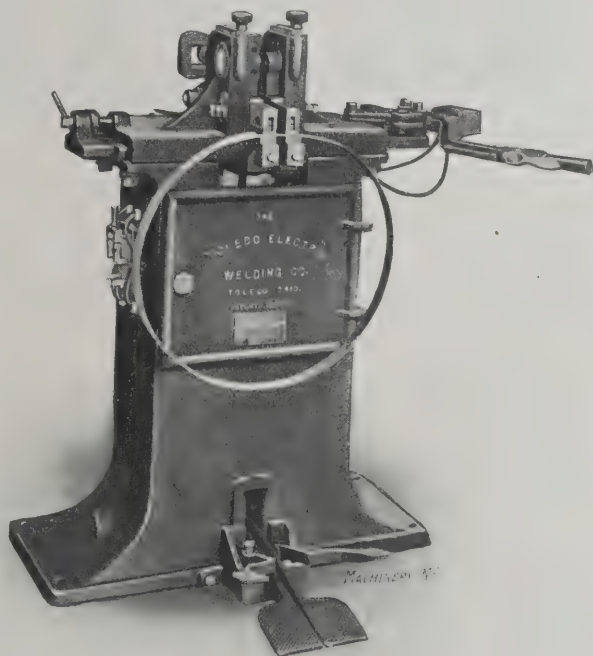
Universal Welding Machine for Steel up to $\frac{3}{4}$ -inch Diameter
